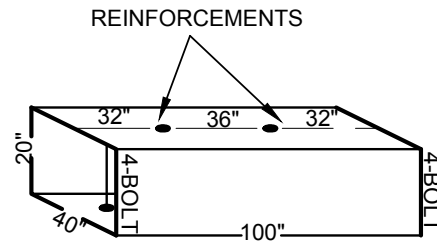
TIE ROD CROSS-SECTION SPACING
